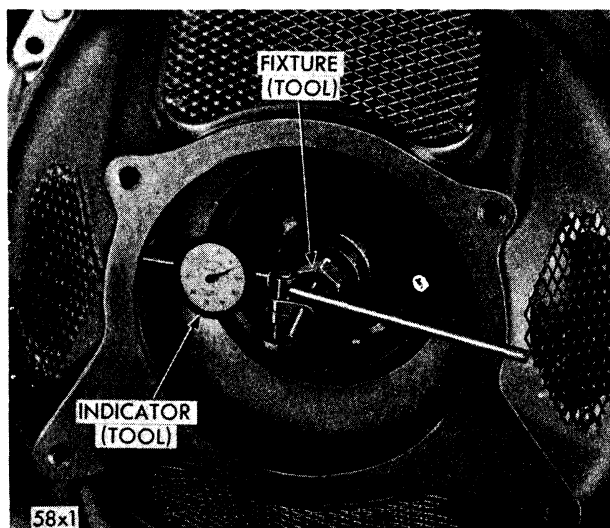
Checking Housing Bore Runout (Typical View—Housing for Air Cooled Converter Shown)
